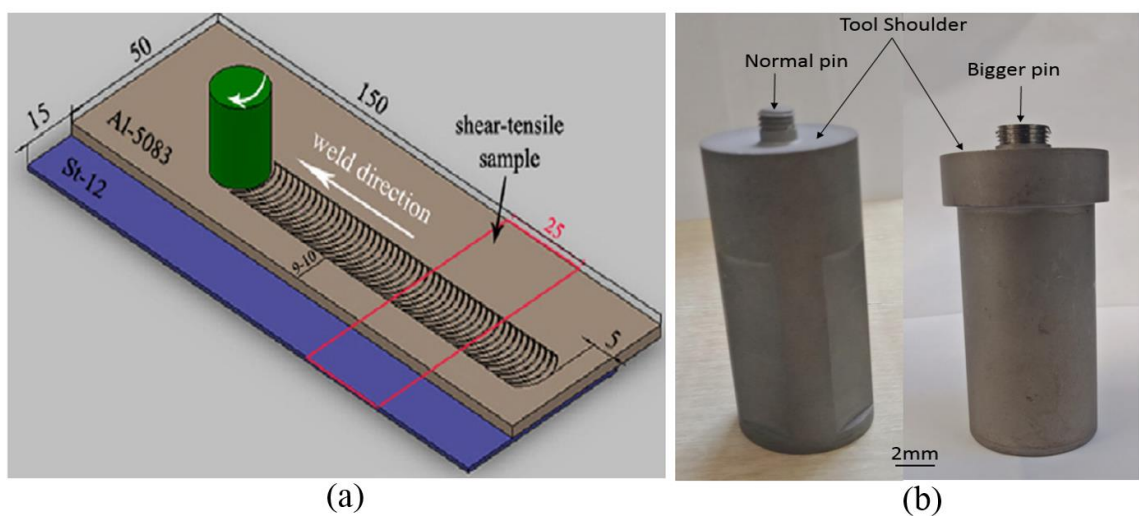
Schematic Illustrations of friction stir lap welding process[7] and (b) two different sizes of actual FSW tools with threaded pins.
